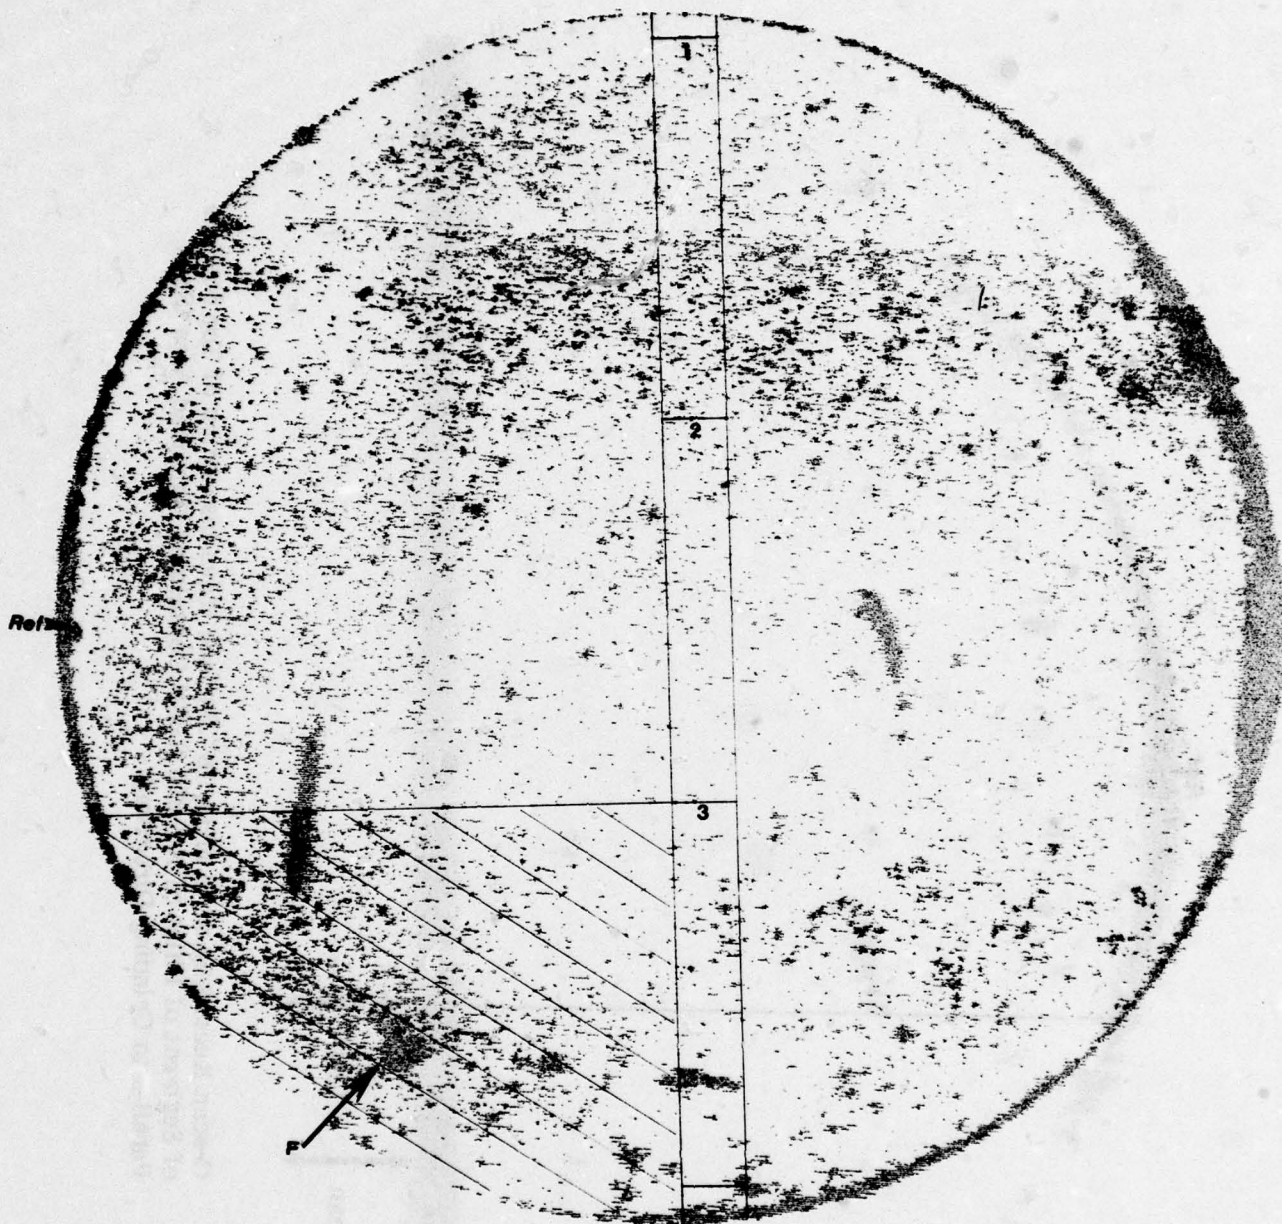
Location of Burner Rig Specimens and Machined (Shaded) Area Overlayed on C-scan Recording of 45 MHz, 18° Surface Wave Inspection of Top Surface of Billet of NC-350 RBSN.
